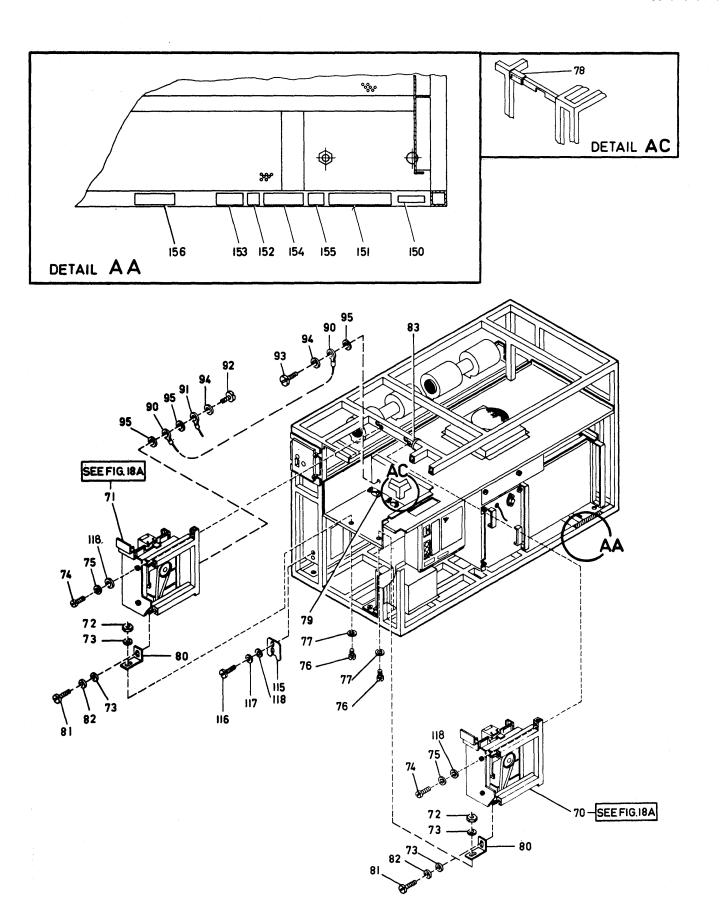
FINAL ASSEMBLY (SHEET 2 OF 2. INDEX NO. 70 THRU 156)
